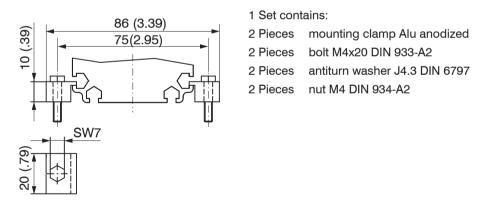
Mounting clamp MT60-WDS, dimensions in mm (inches)
